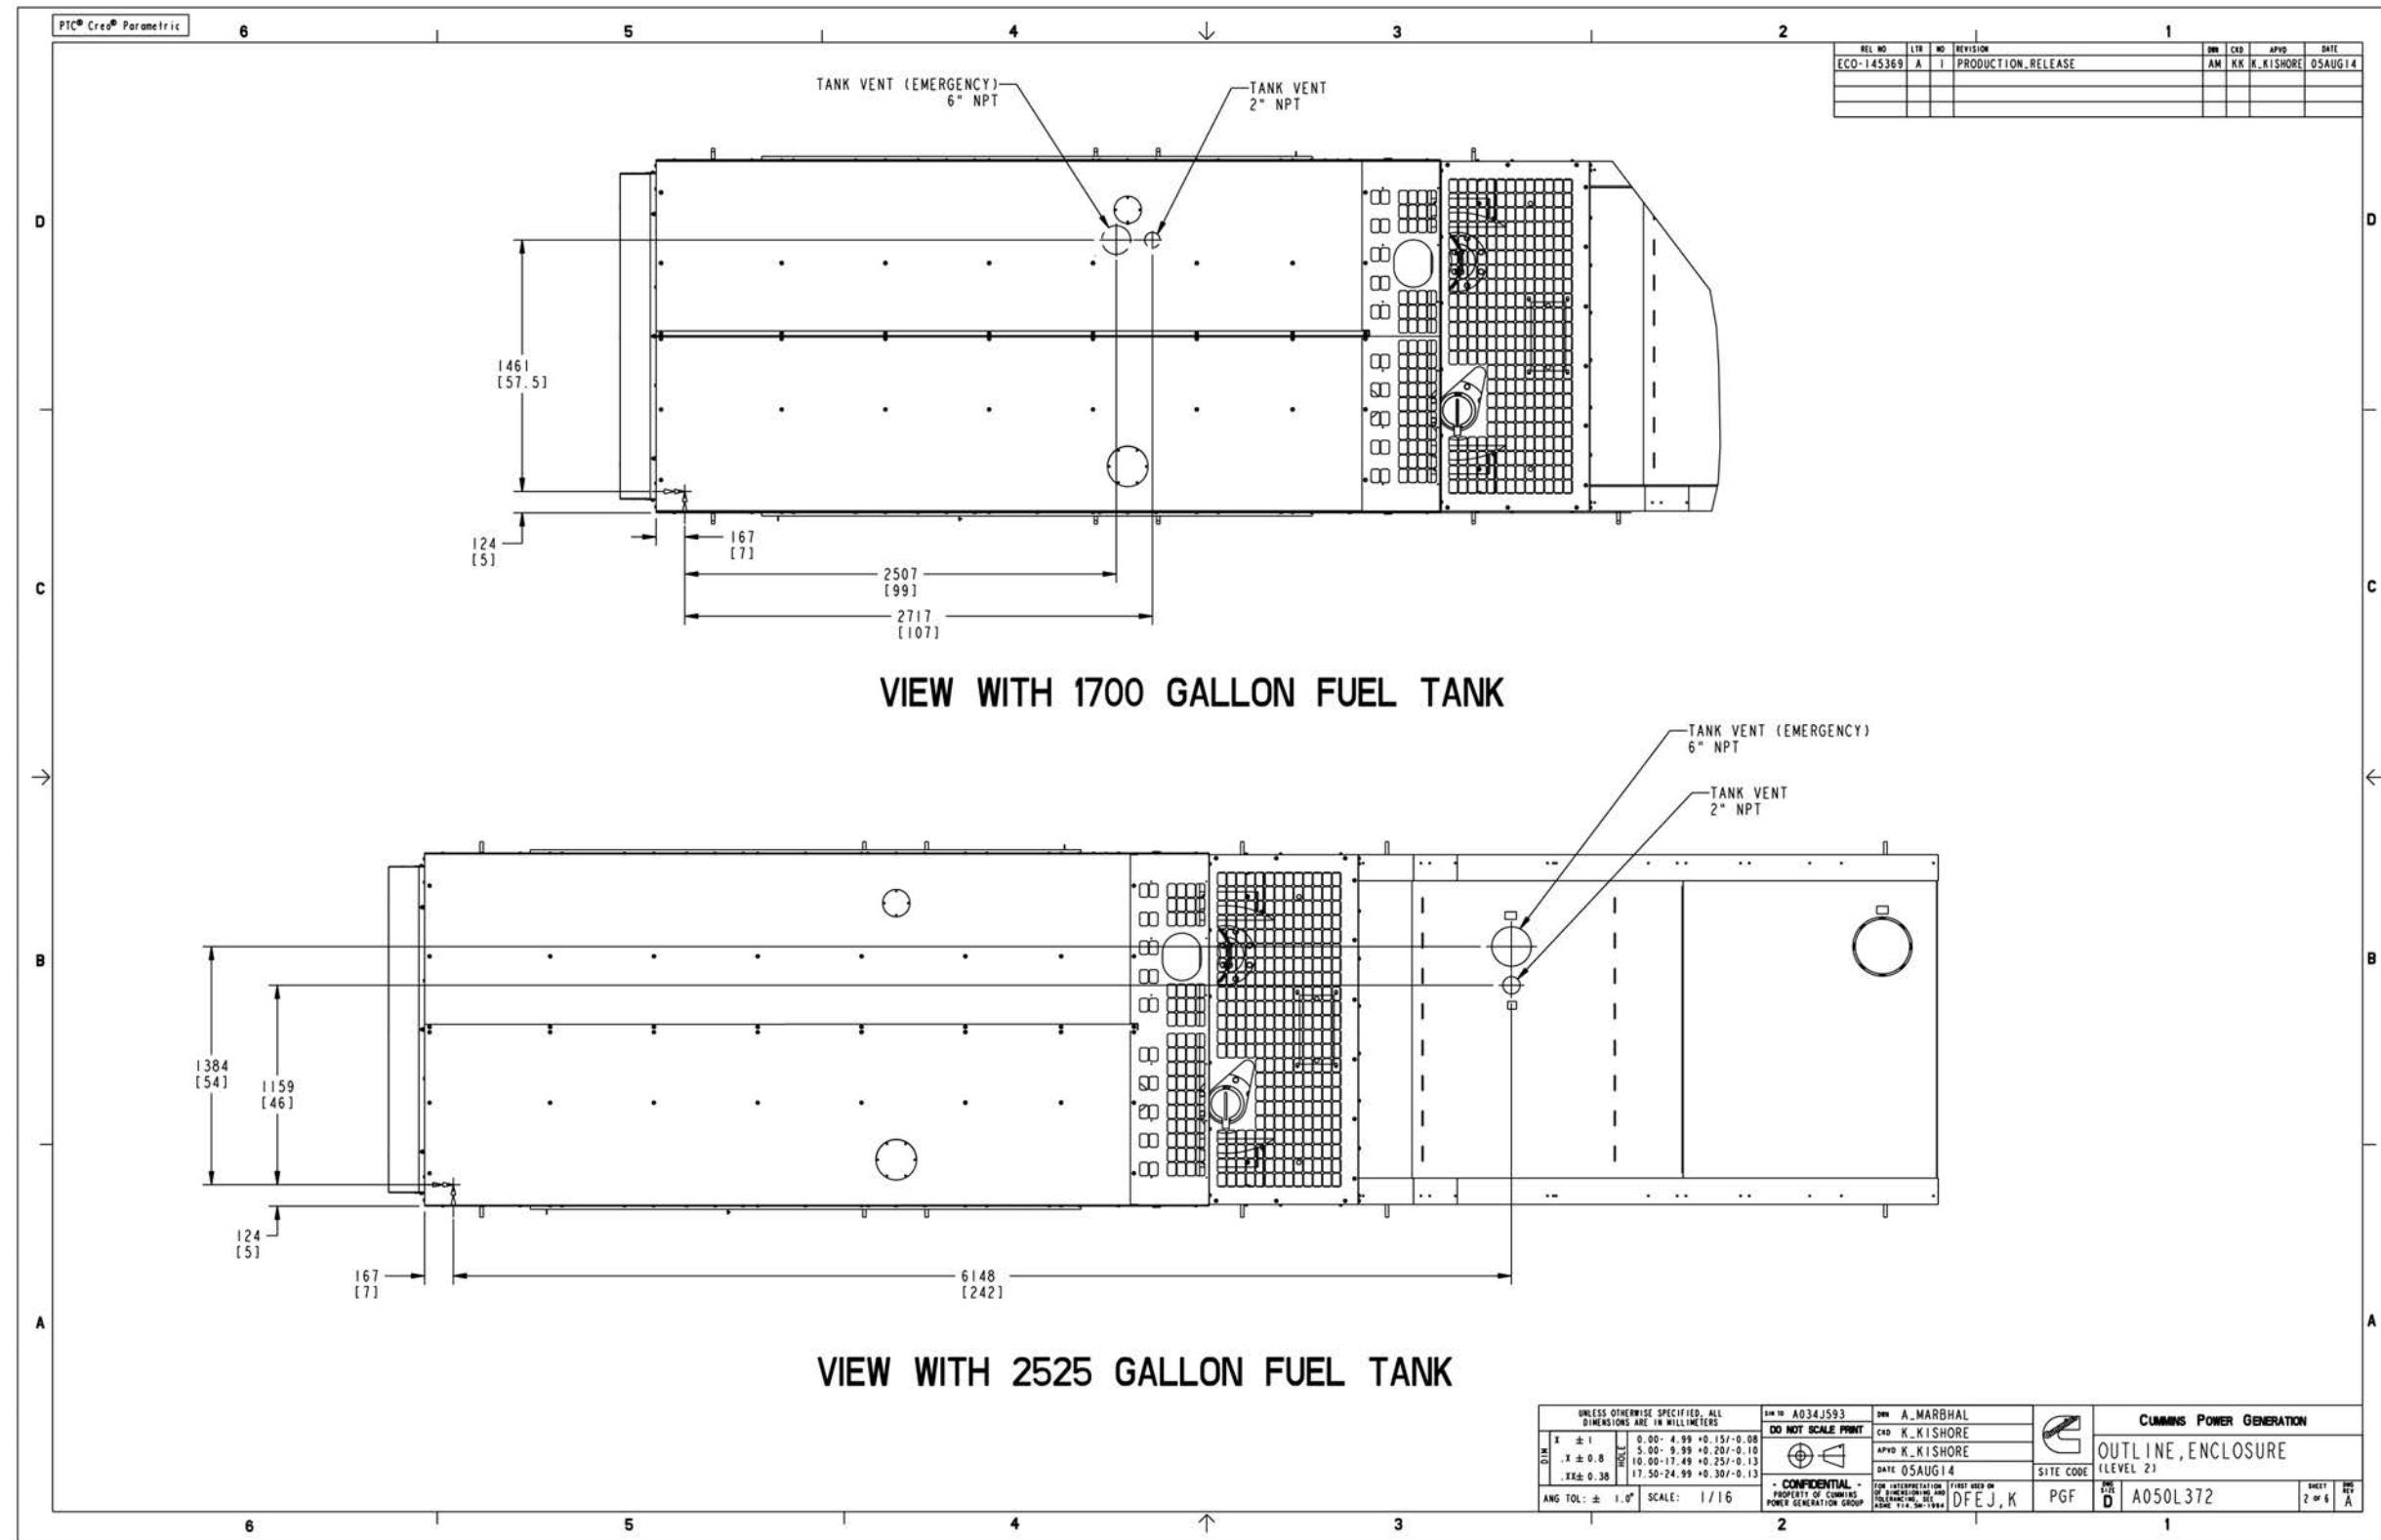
ENCLOSURE OUTLINE DRAWING (F202, F205, F206, F208, F209) (SHEET 2)
